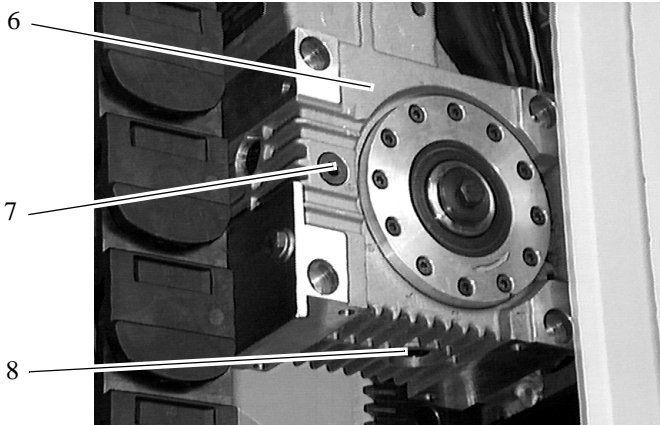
Gearing of Axis 6 (V-Axis)
